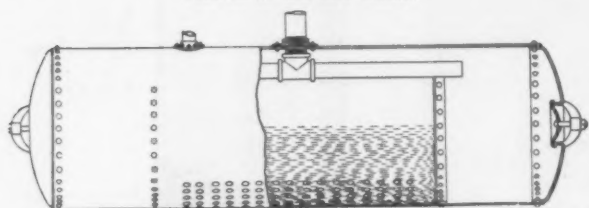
Detail of the Upper Drum, Showing the Steam Storage Space.
